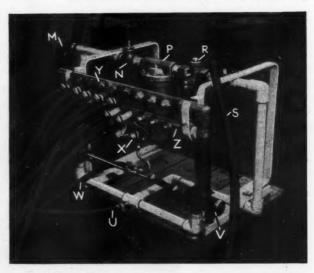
This air supply trolley has been developed by Vickers Armstrongs (Engineers), Ltd., for the control and delivery of compressed air to the tools in the fixture on the radial drilling machine. [Incorporating valves, filter, lubricator, and multiple outlets, it can be used for other duties
